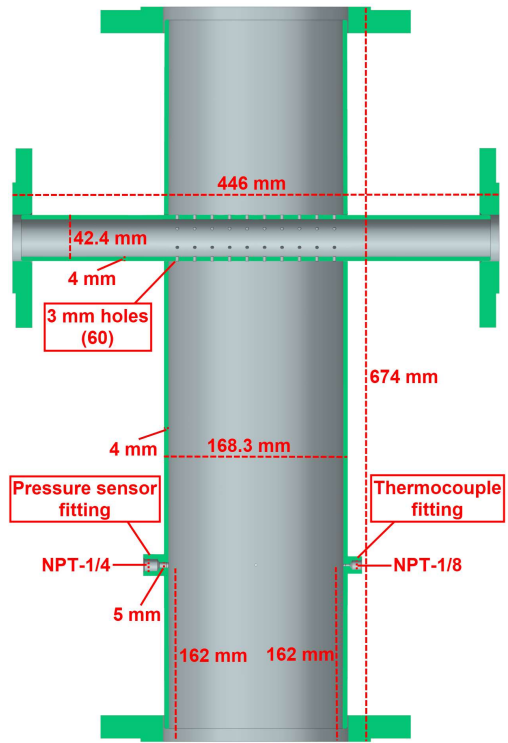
Plenum chamber assembly (cross-sectional view 1).
